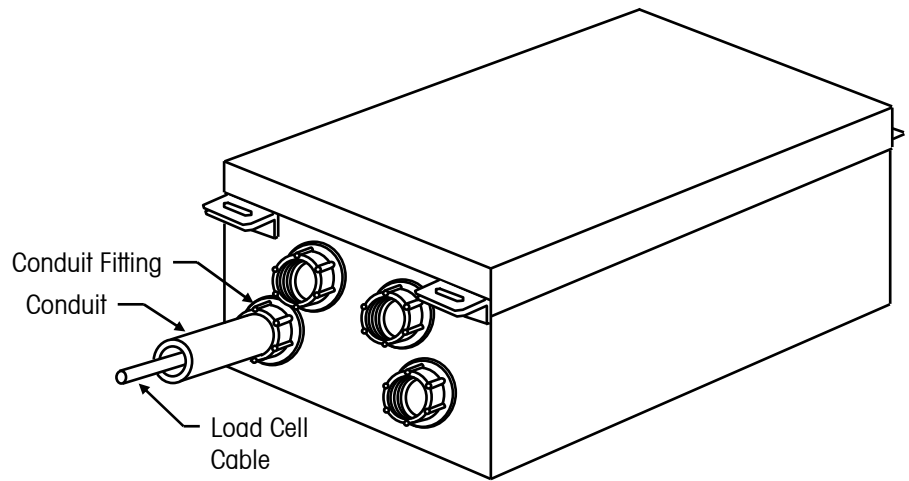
Large Analog Junction Box with Conduit Fittings
